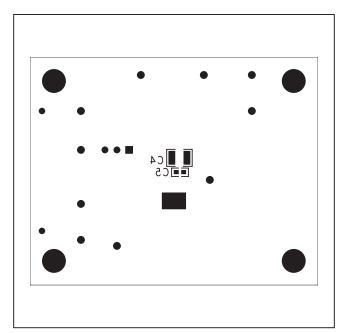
MAX16909 EV Kit Component Placement Guide— Solder Side
